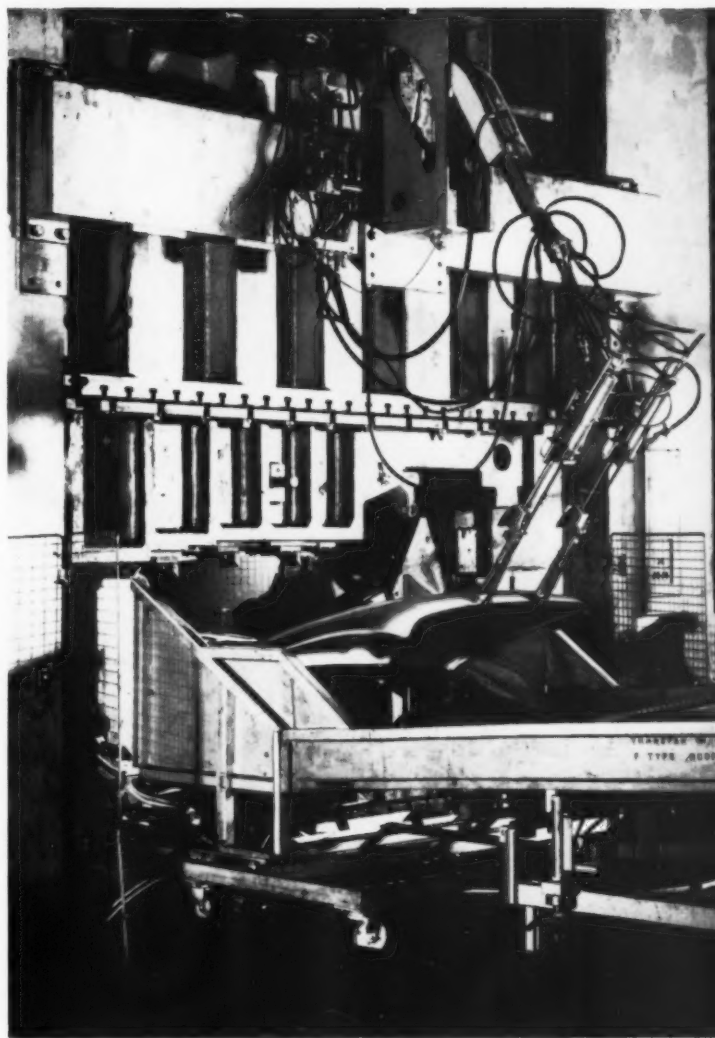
Shown in this photograph, is a twin jaw extractor removing a car roof pressing from the die of the press and placing it on an inter-press transfer station. The two jaws which grip the pressing are operated by Maxam air cylinders which can be seen mounted behind the jaw assembly
